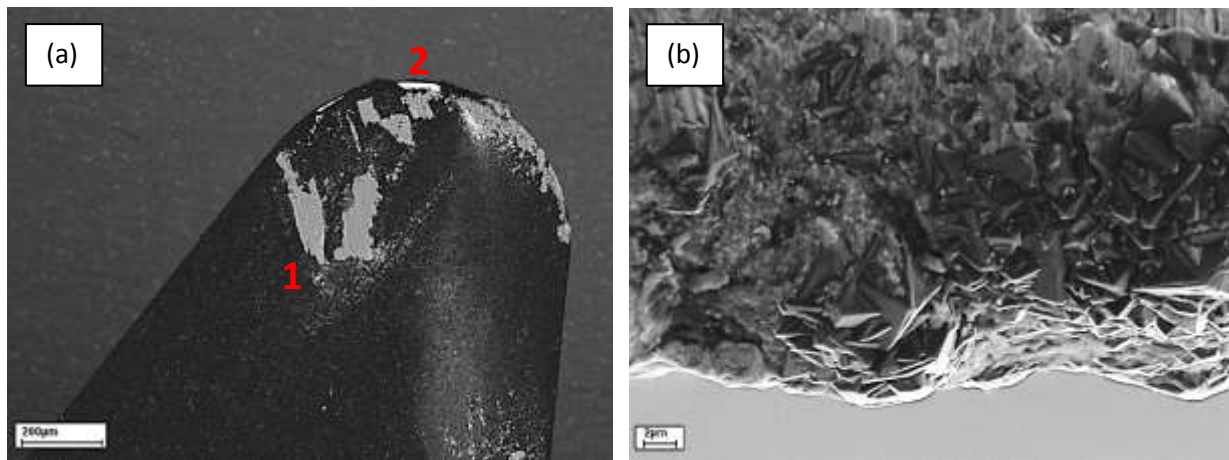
Commercial MCD tool after trial (a) cutting tip (b) cutting edge
